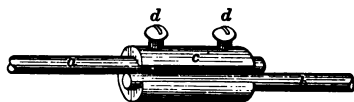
Slotted Sleeve Connection in which Solder is not Used.
